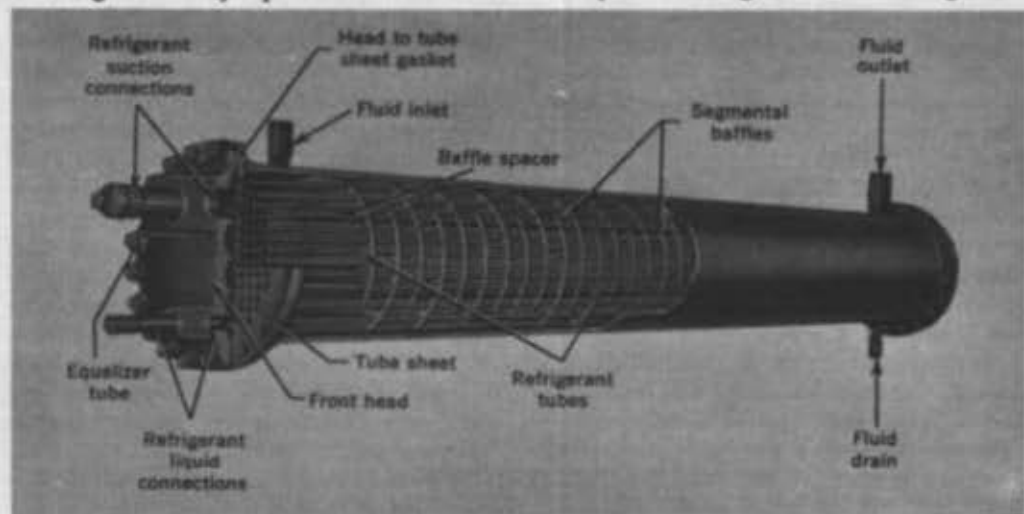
Cutaway section illustrating construction details of dry-expansion chiller with fixed tube sheets. (Courtesy Acme Industries.)
